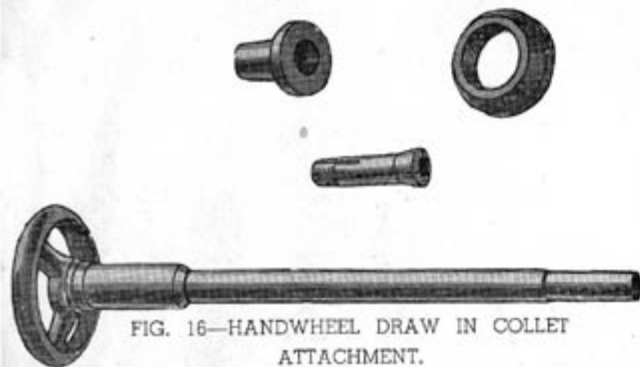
HANDWHEEL DRAW IN COLLET ATTACHMENT.
